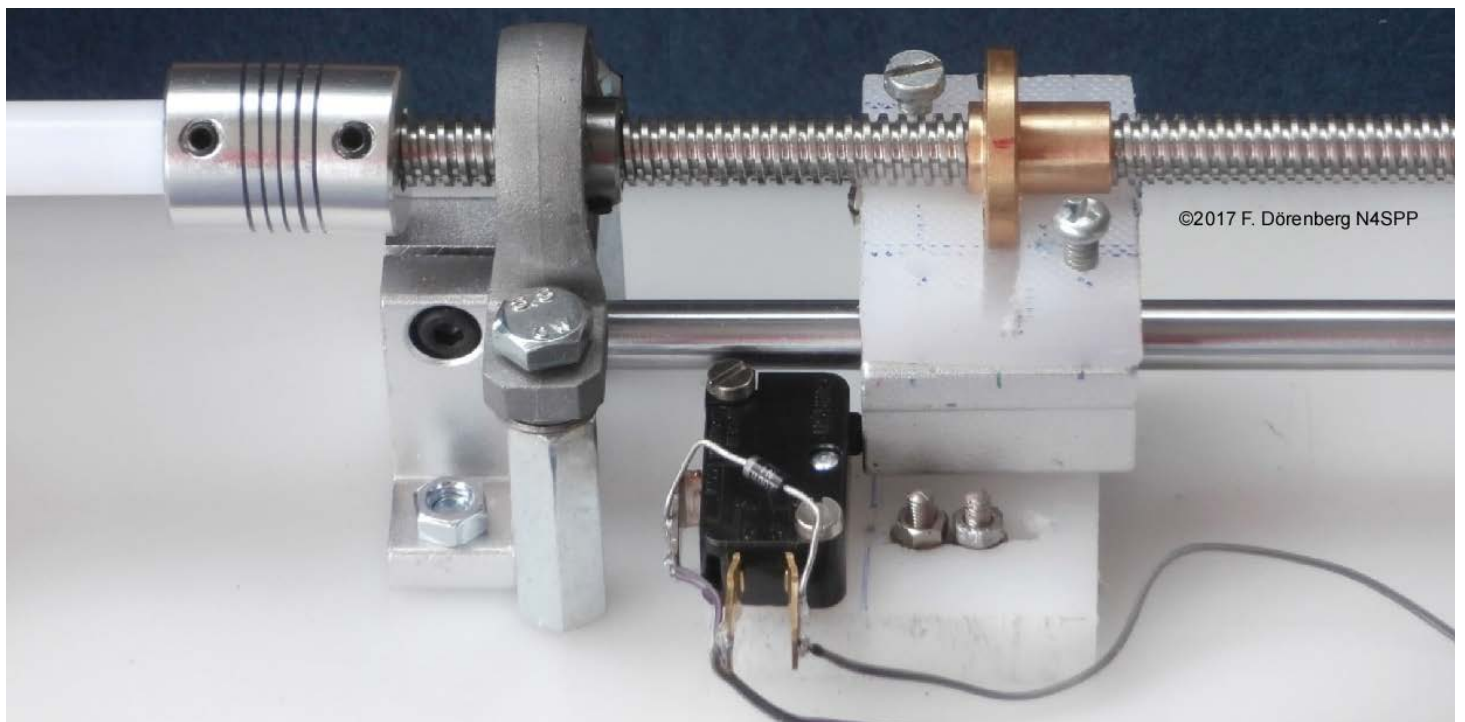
Close-up view of one end-stop with micro-switch, actuated by the sliding block
